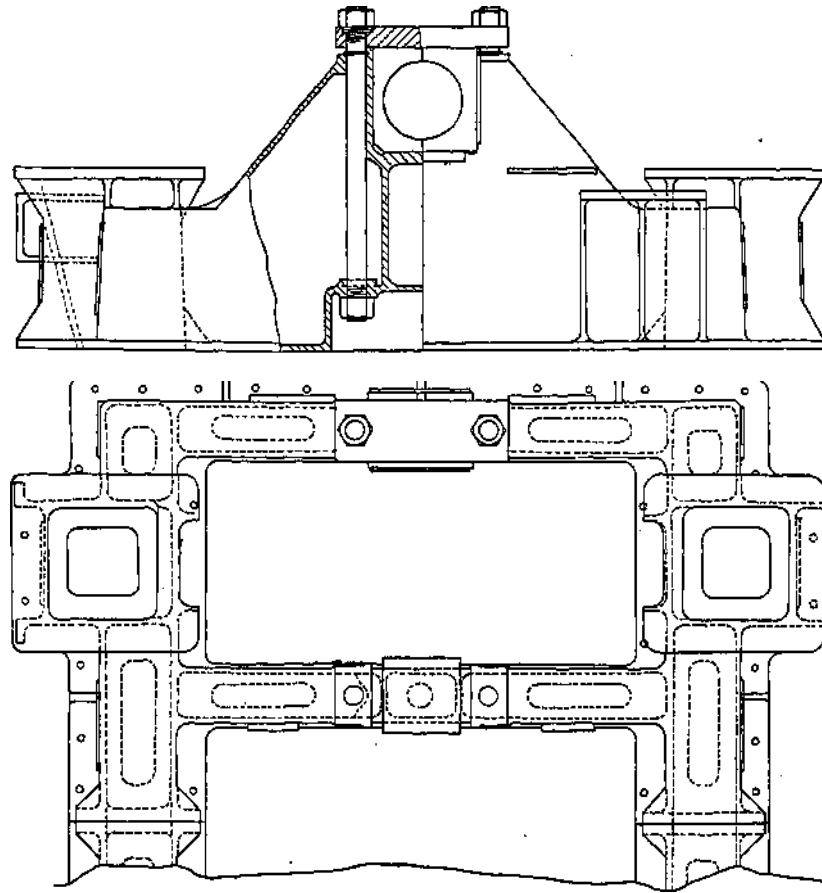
Marine-engine Bedplate showing Sectional View of Main Bearing
